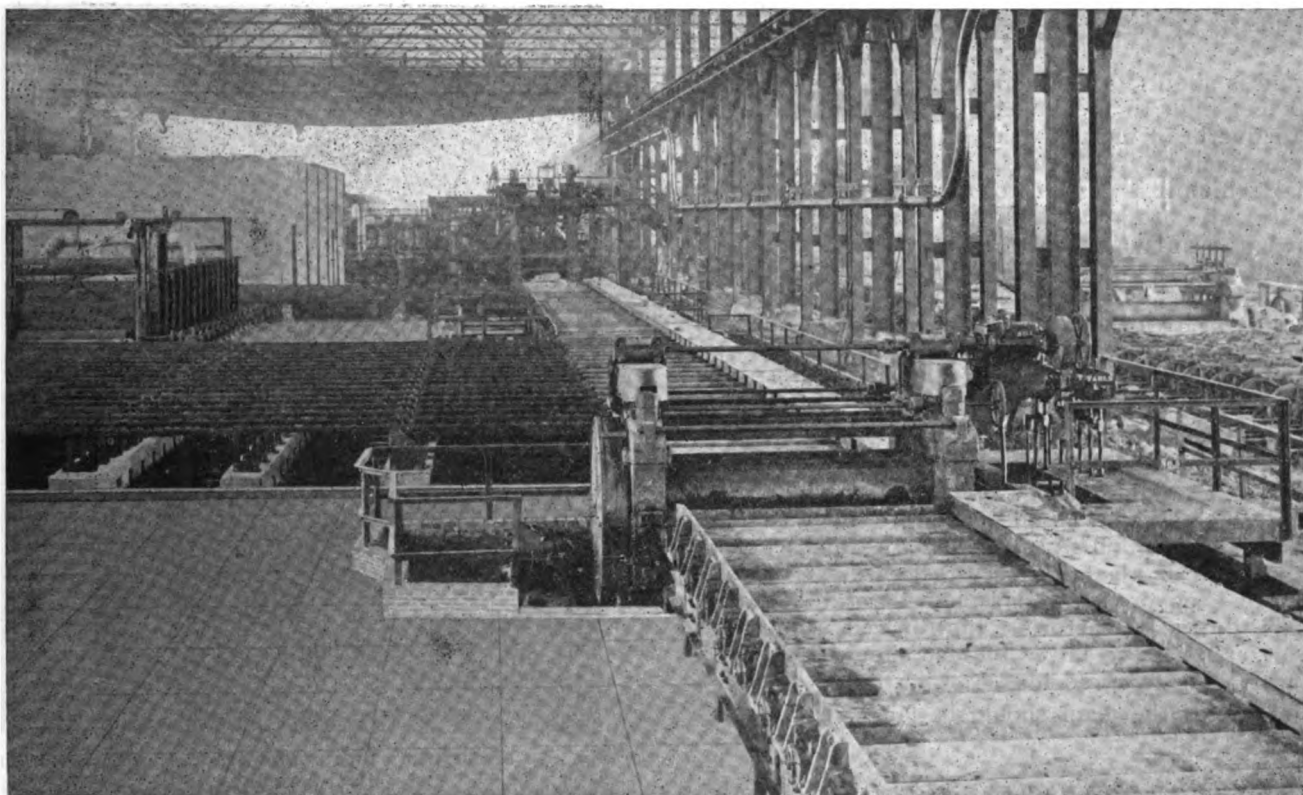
A plate mill built by the United Engineering & Foundry Co., equipped with every modern improvement, Brier Hill Steel Company.
